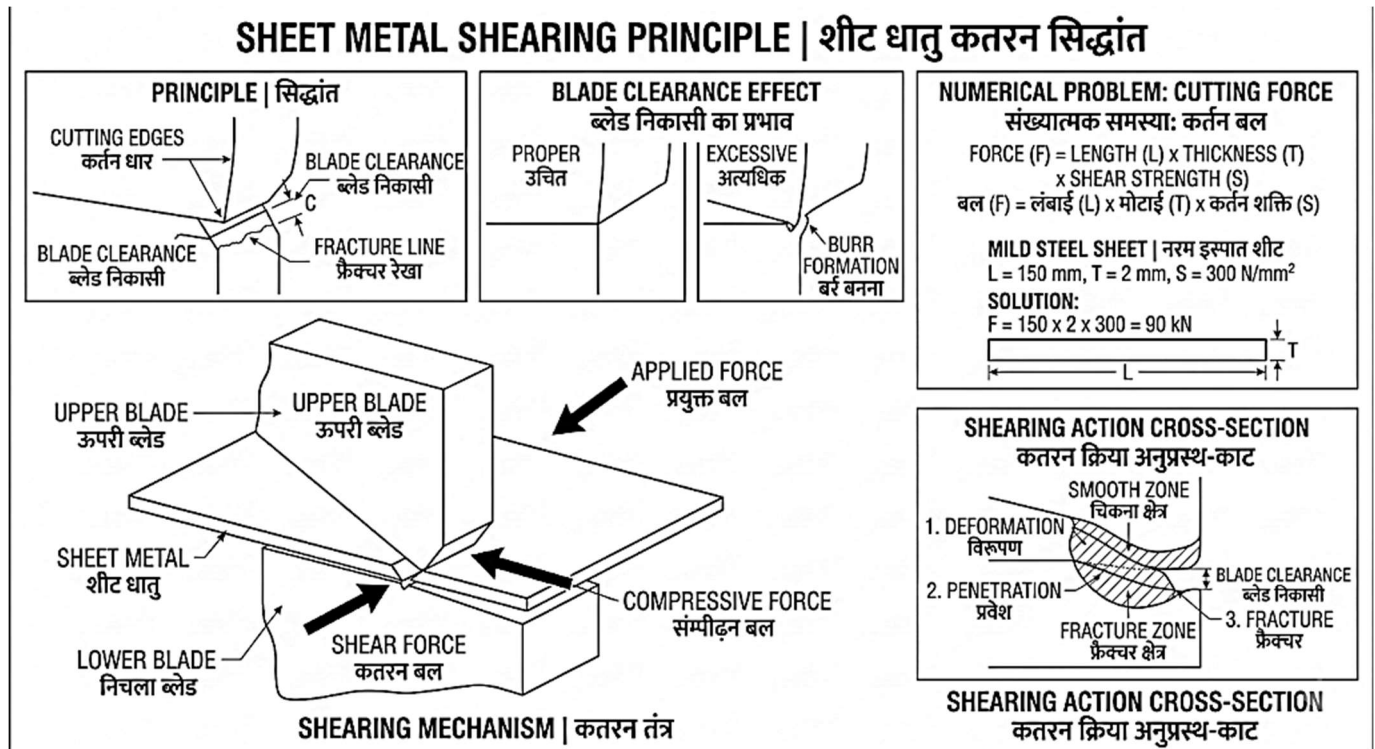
Sheet Metal Shearing Process | शीट मेटल शियरिंग प्रक्रिया
